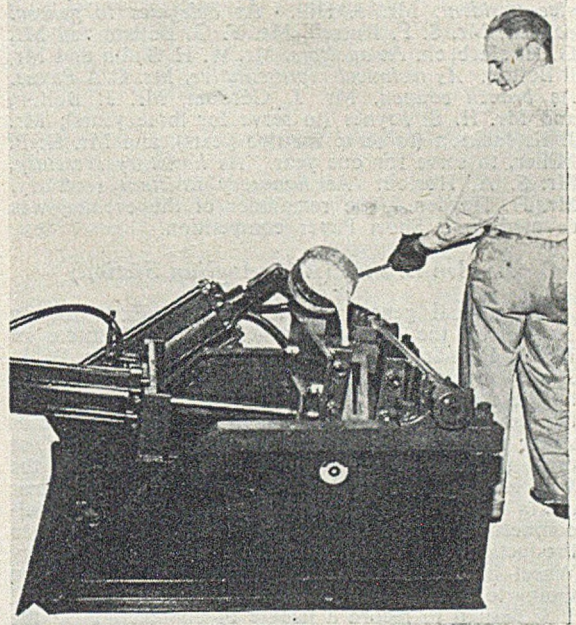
PERMANENT-MOULD CASTING MACHINE SUPPLIED AS A COMPLETE UNIT.
